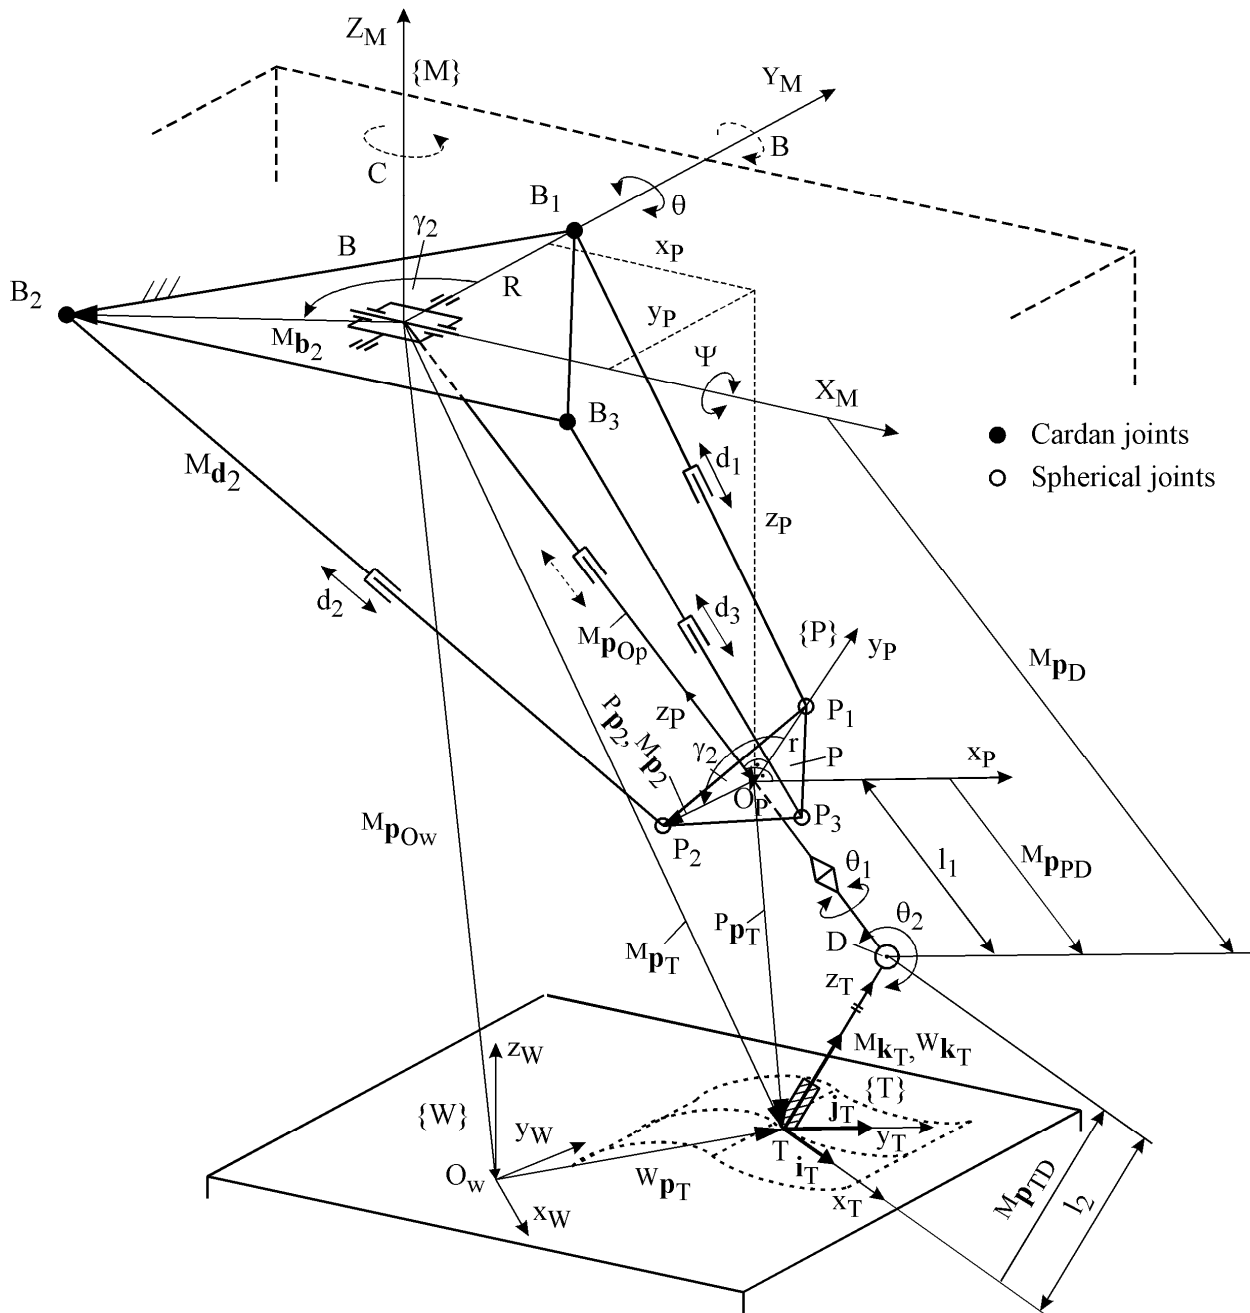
Geometric model of the Tricept based vertical five-axis machine tool
